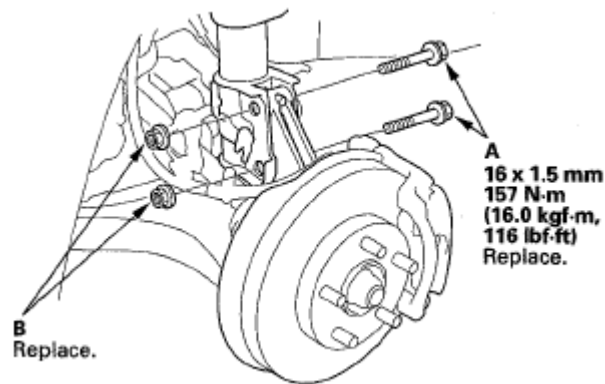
Identifying Damper Pinch Bolts And Flange Nuts With Torque Specification
